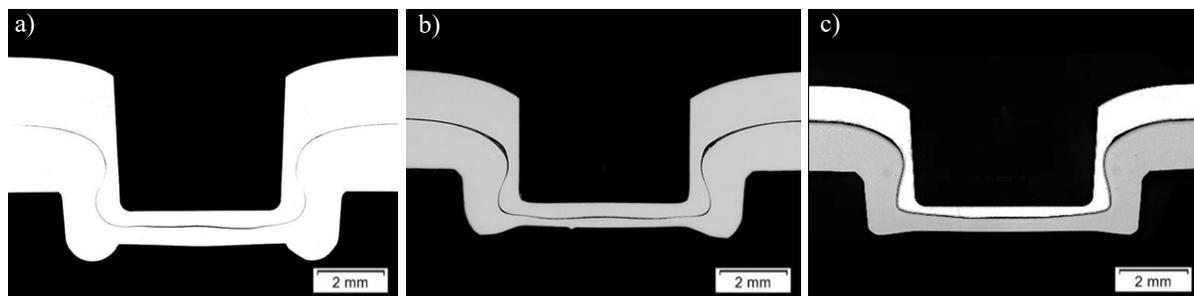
Cross-section of the different clinch joints (a) Al-Al clinch joint, sheet thickness 2 mm; (b) St-St clinch joint, sheet thickness 1.5 mm; (c) Al-St clinch joint, Al-sheet 1 mm and St-sheet 1.5 mm
